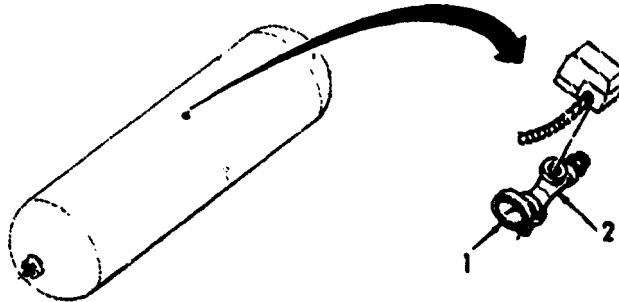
Air Pressure Gage, inspection/Removal/installation.
